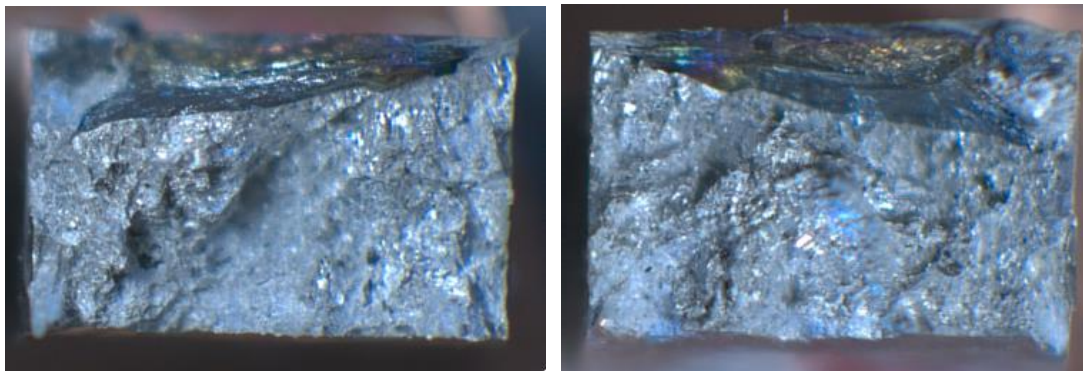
Double oxide film defects on the fracture surface of an Mg-Y tensile test bar produced under a cover gas of 0.5%SF₆/CO₂. The size of the test bar is 5 mm × 8 mm.
